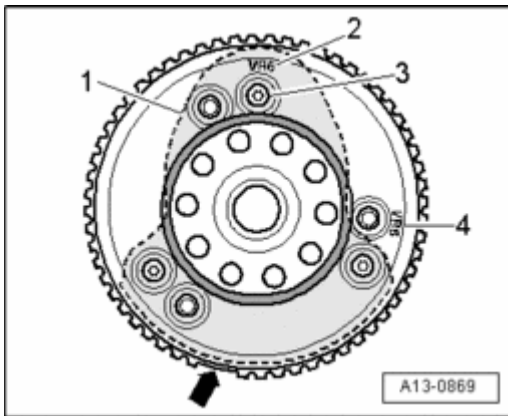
Identifying "VR6" Marking Positioned At Bore Of Bolt That Goes Into Crankshaft Crankpin
